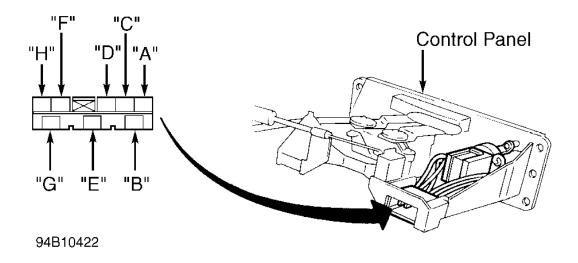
Identifying A/C Switch Terminals Courtesy of MAZDA MOTORS CORP.
